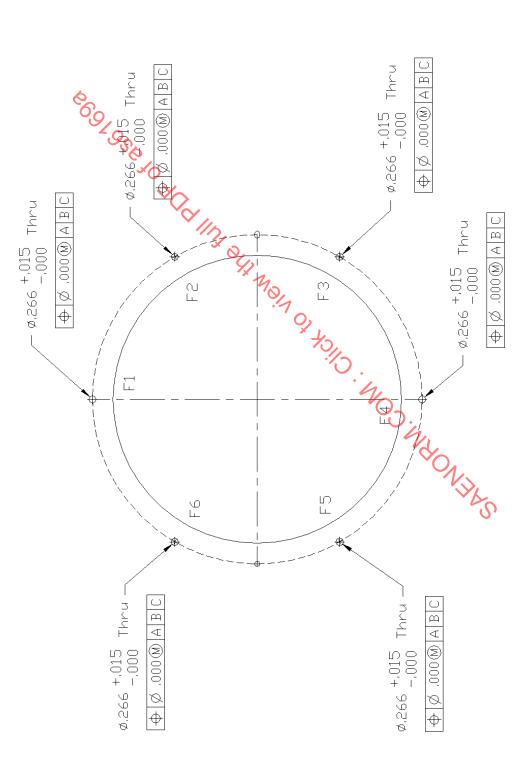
SPECIFYING SIX THRU HOLES FROM PLATFORM INTERFACE, TURRET CLASS II, ACCESS HOLE EXAMPLE
